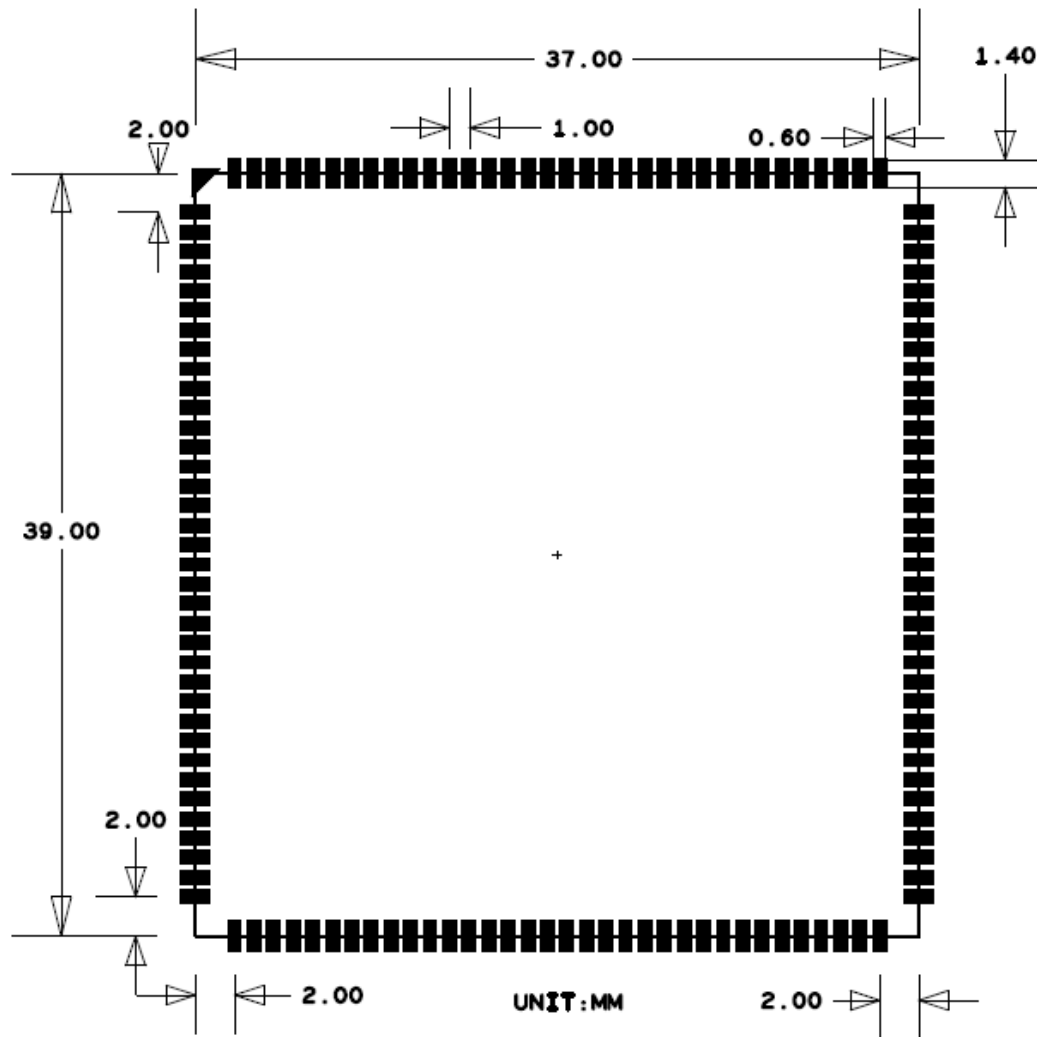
Recommender PCB Footprint of MYC-Y6ULX
